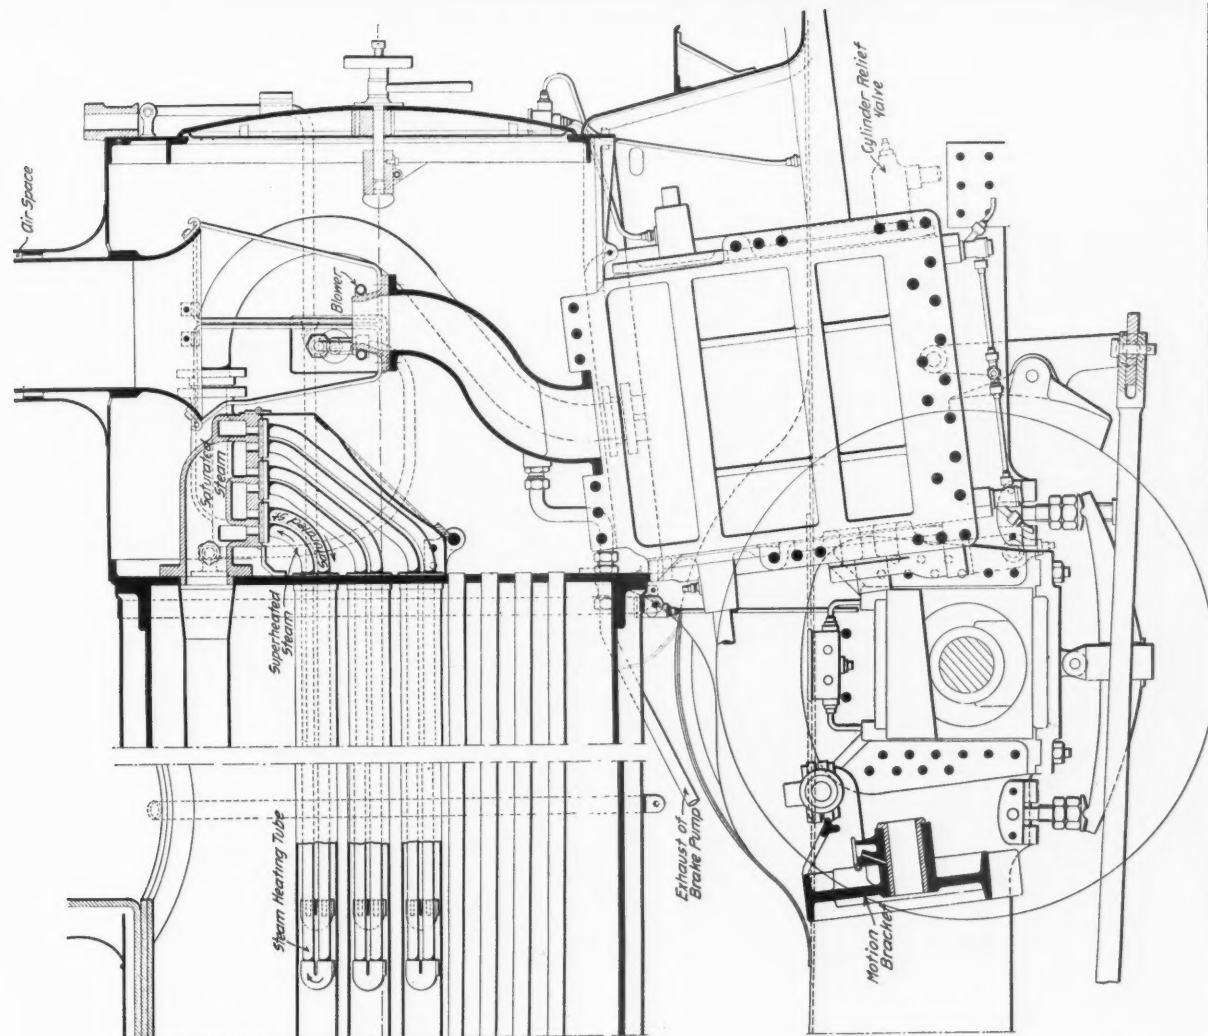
Longitudinal Section Through Smoke Box of Belgian Locomotive Equipped with Latest Type of Schmidt Superheater.
